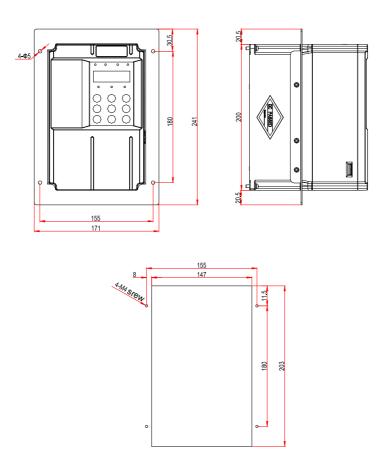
Dimensions of through hole mounting bracket and hole of MD500ET3.7GB to MD500ET5.5GB
